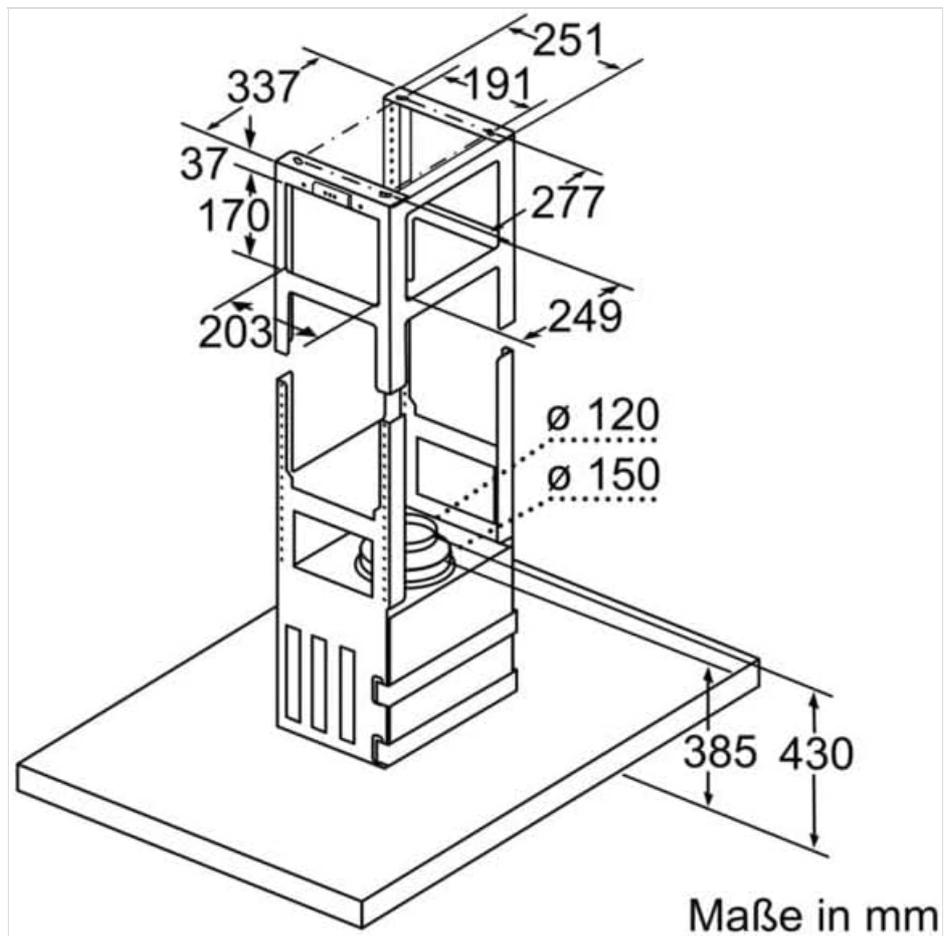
Internal mounting frame and ducting details (measurements in mm).
